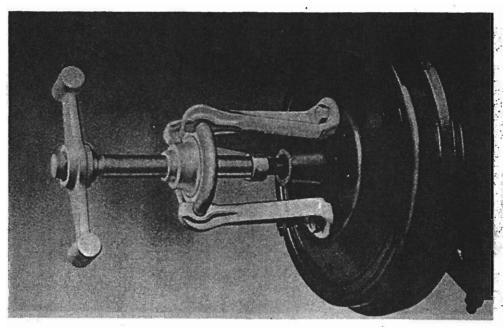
Always Use a Wheel Puller of the Type Shown When Removing the Rear Brake Drums.
